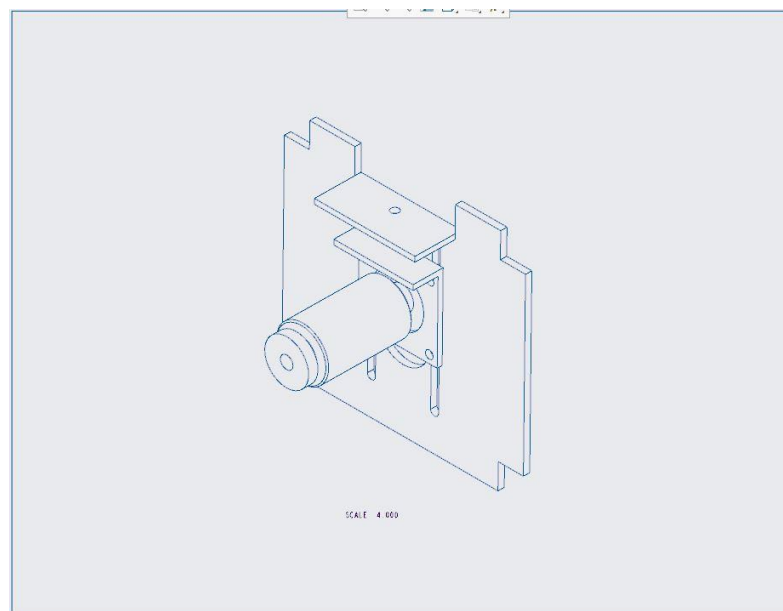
Isometric view for sliding motor plate, motor gears and coupling
